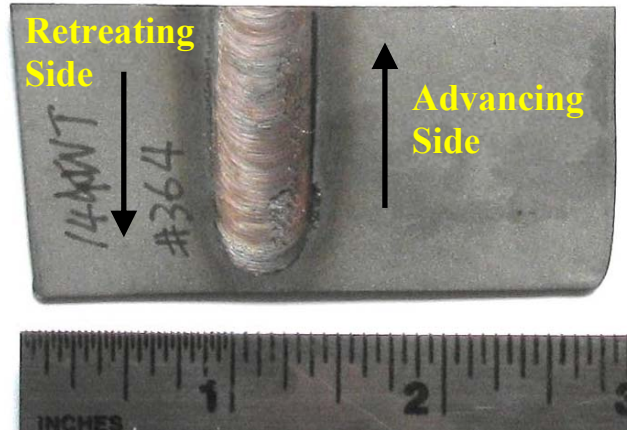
Optical image showing the bead-on-plate weld zone obtained by FSW on the 0.1 cm thick plate of 14YWT.
